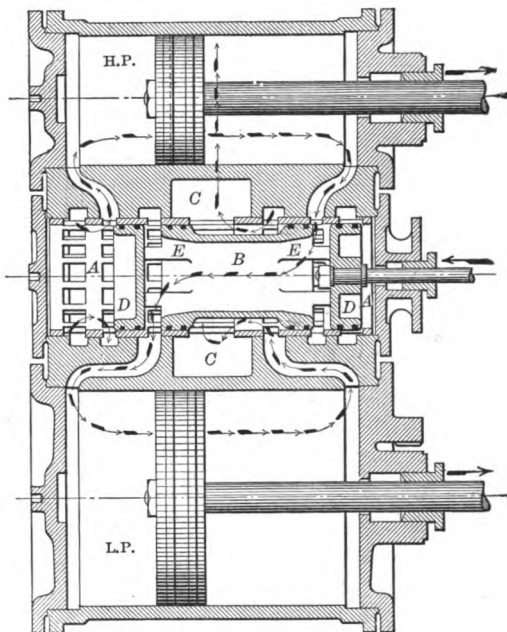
VACLAINE LOCOMOTIVE PISTON VALVE
